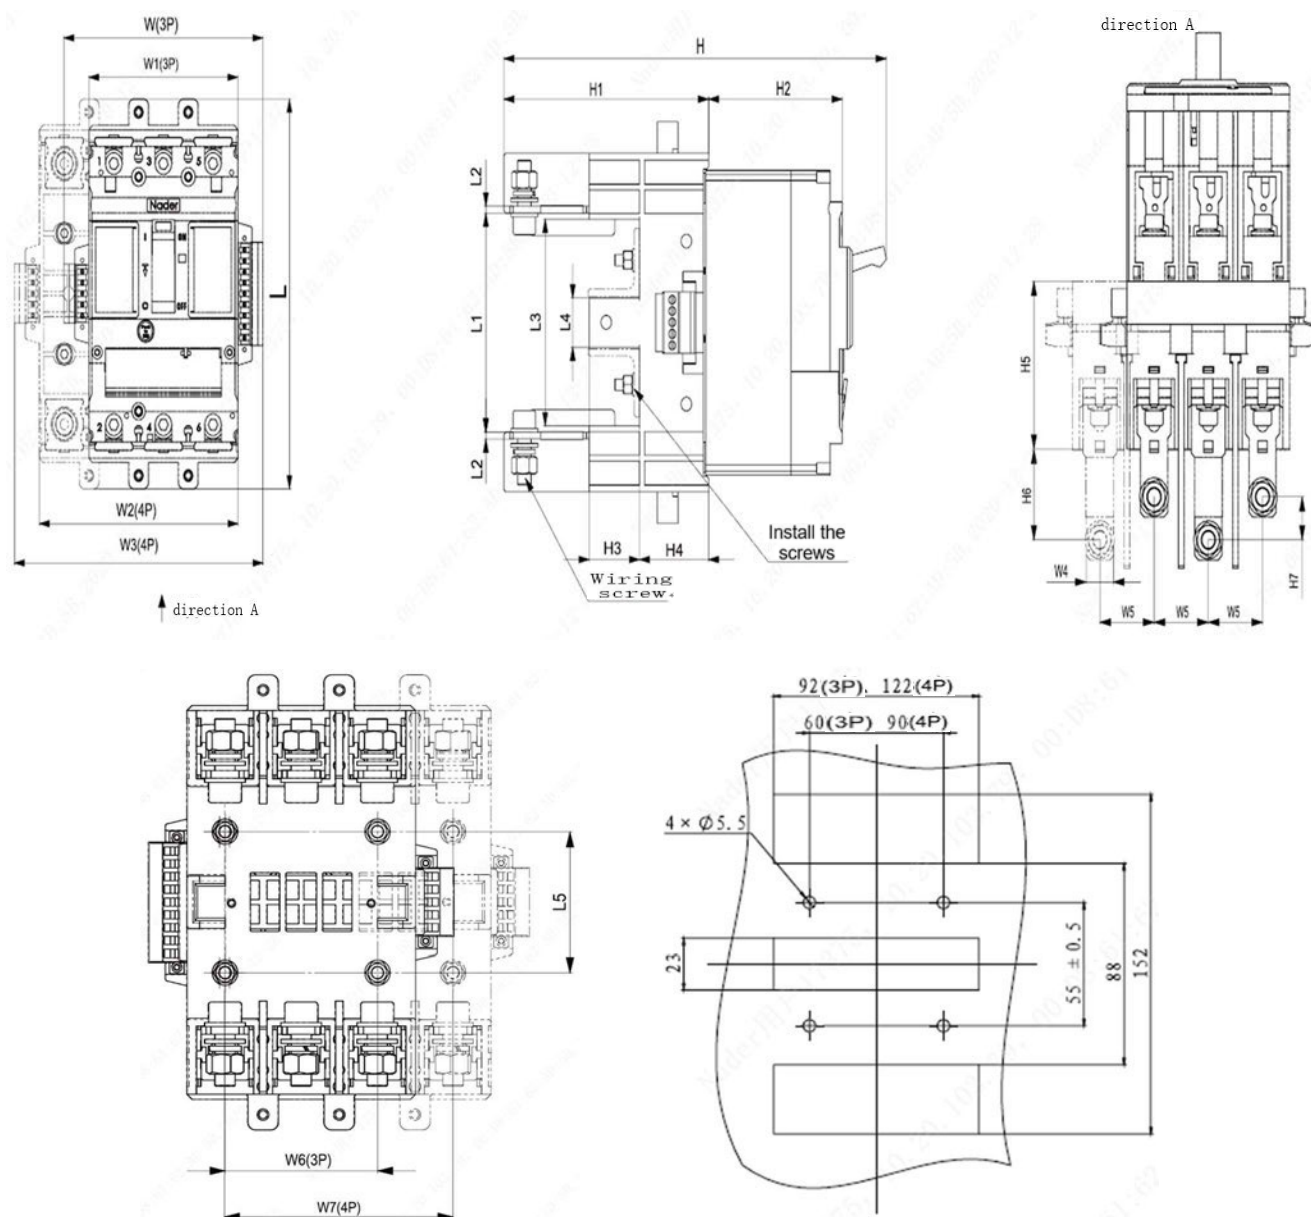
3P、4P Mounting hole dimensions of plug-in connections
